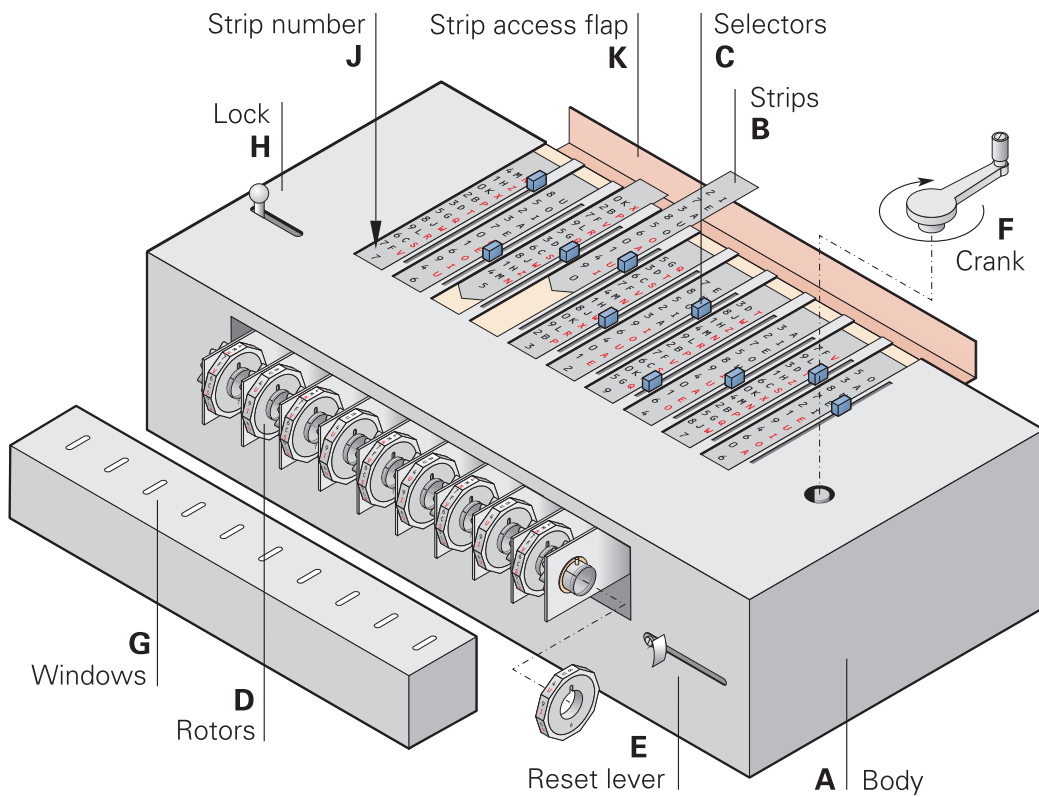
PBJ machine with strip access flap open and rotor cover removed
